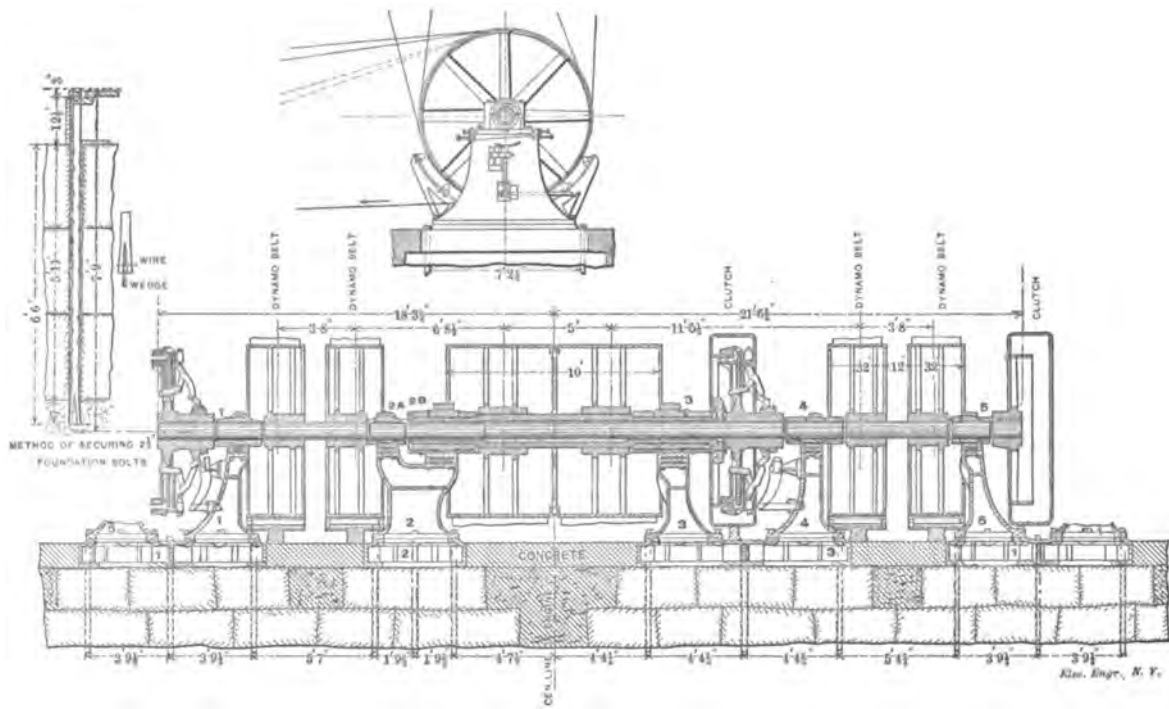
SHAFT FOR 2,000 H. P. ENGINE.
